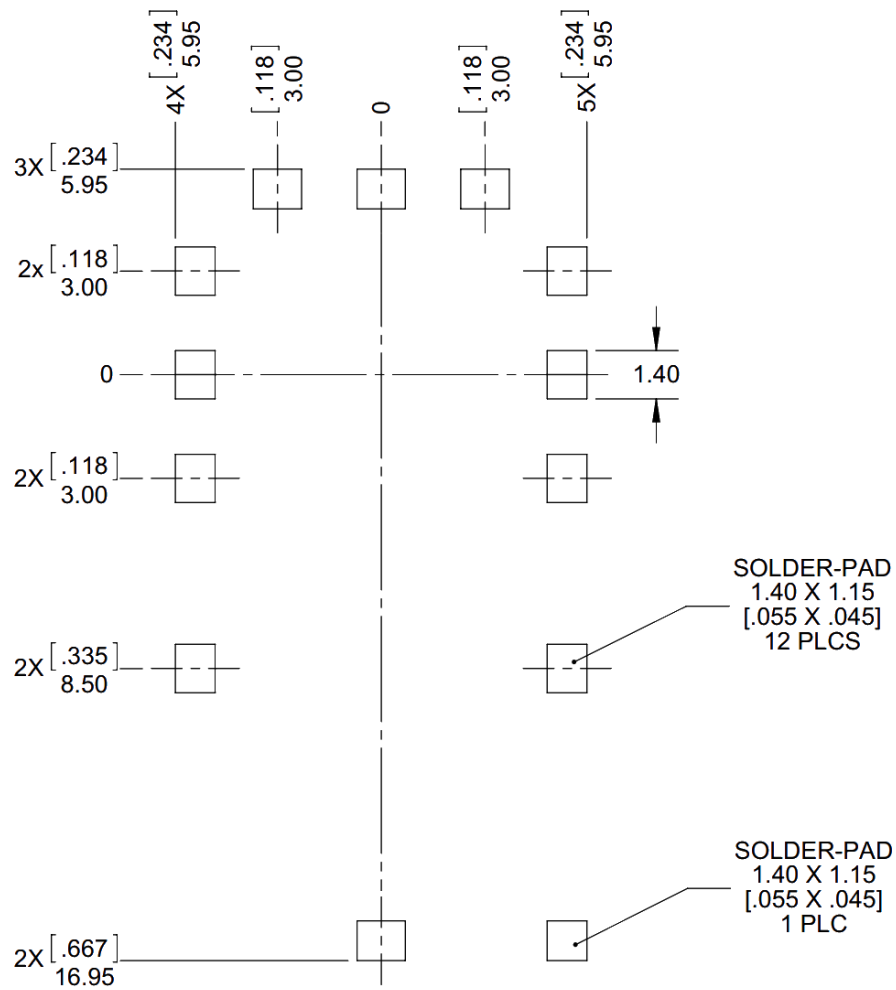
SENtral M&M Blue Solder Pad Layout
